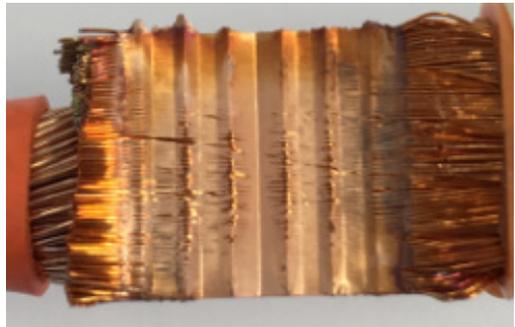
Illustration of visual aspect of the welding joint from sonotrode side
